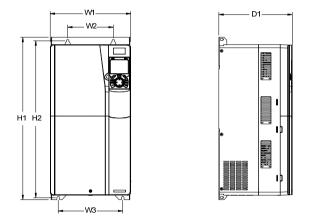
Wall-mounting diagram of inverters of 380 V, 45 to 75 kW
